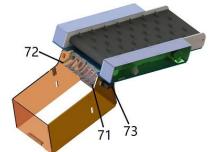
Conveyor belt bonded garbage cleaning unit-- cleaning the garbage of rake teeth
